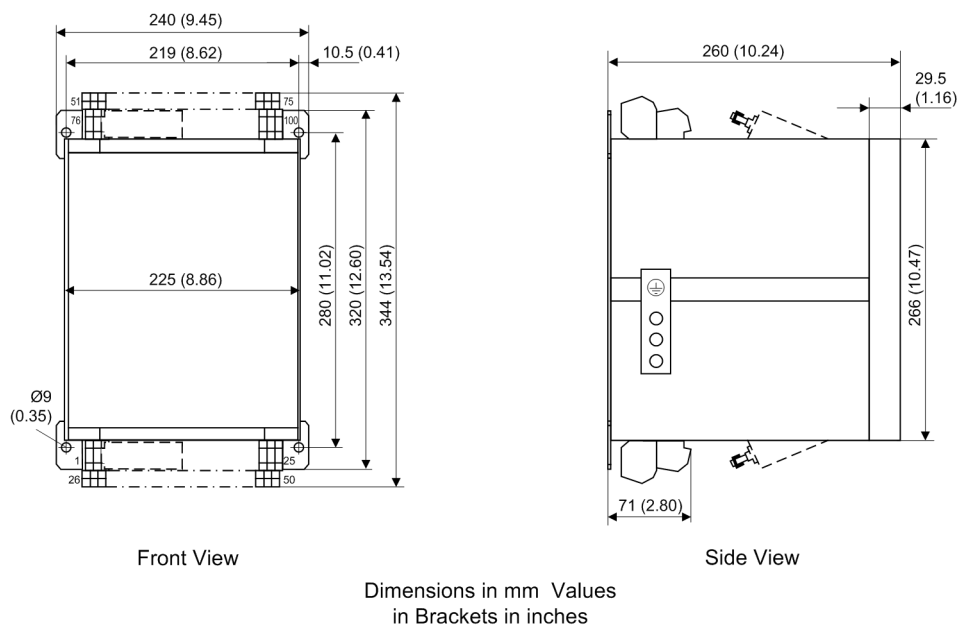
Dimensional drawing of a 7SJ64 for panel flush mounting (housing size $\frac{1}{2}$)
